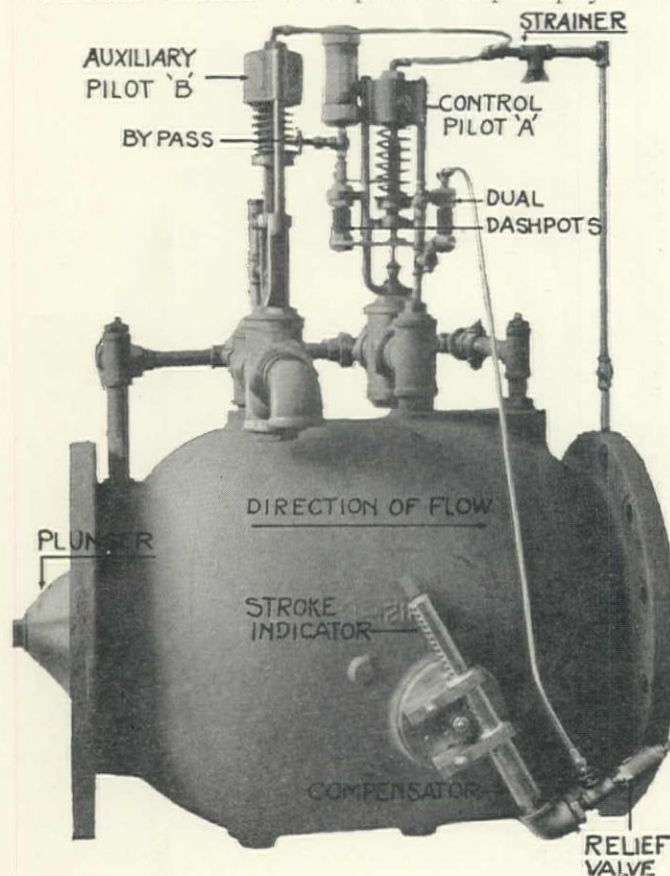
Shop Assembly View of a Larner-Johnson Pressure Regulator
